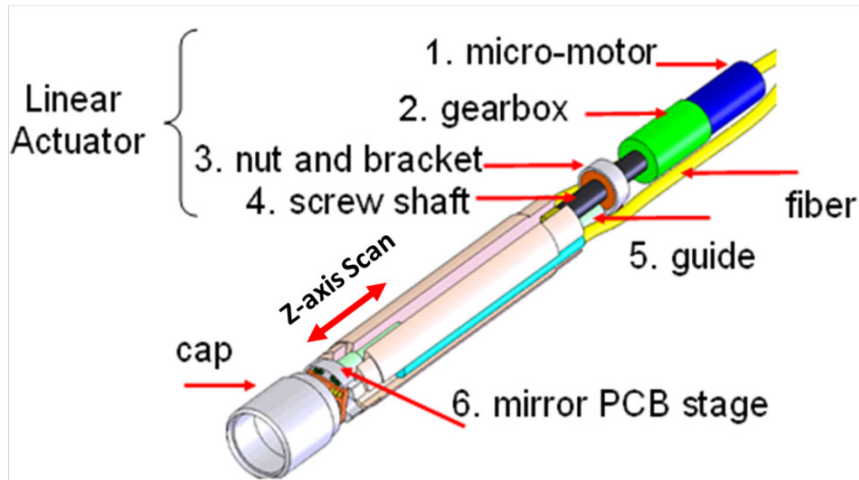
Electromagnetic mini-motor driven in OD5mm dual axes confocal endomicroscope. Key mechatronic components: (1) Micro-motor (micro-mo); (2) Gearbox (3) Nut and bracket for connection between screw and mechanical guide ; (4) High reduce ratio screw shaft to realize ~20 to 200 $\mu\text{m}/\text{sec}$ linear motion; (5) Mechanical guide for connecting micro-mirror' PCB stage with linear actuator; (6) Scanner PCB stage is a holder for MEMS scanner and wiring, in the future MEMS thin film PZT Z-axis actuator will also be mounted on it. Linear actuator consists of gearbox in front of the MEMS scanner, tiny nut and the screw shaft.
